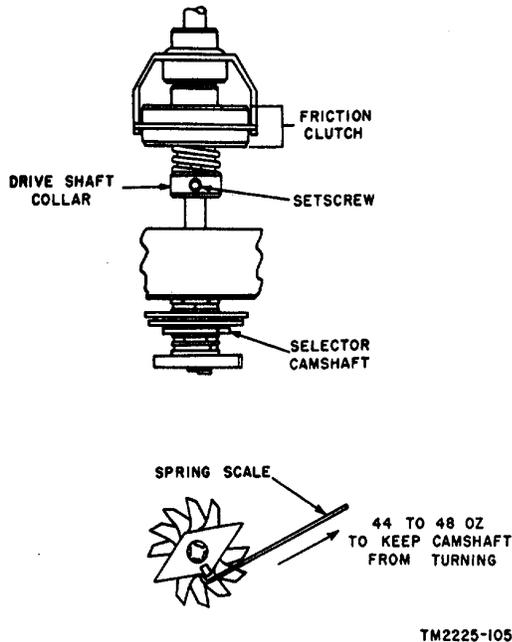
Selector camshaft friction clutch adjustment (TT-76/GGC).
